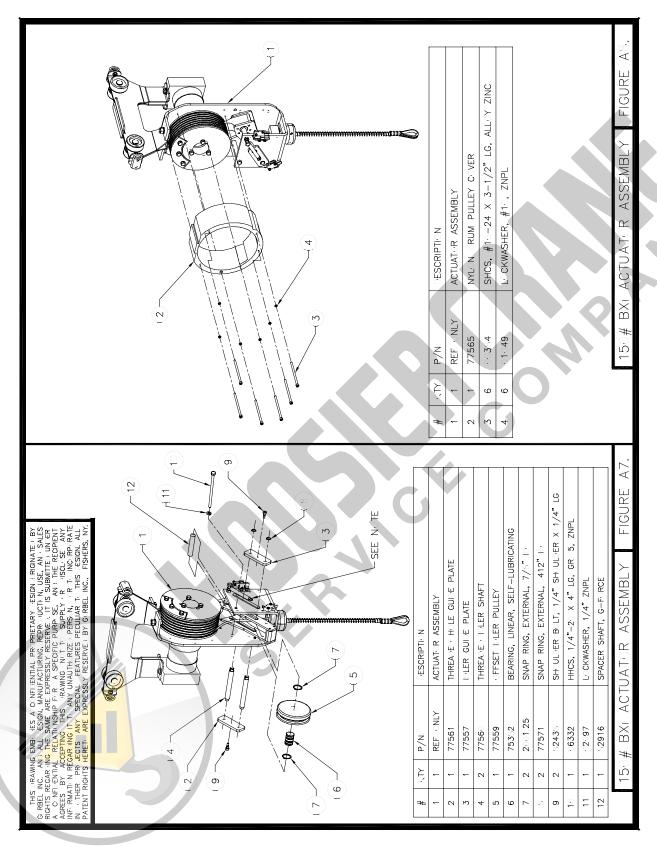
(bottom) & Figure A8 (top). 150# BXi Actuator Assembly.
